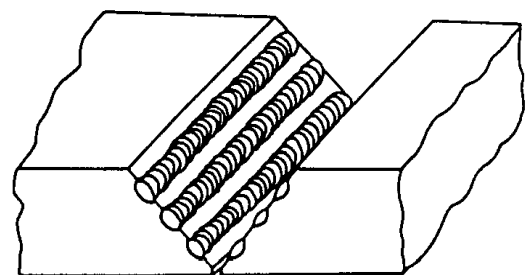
Groove face grooving for welding of cast irons. Source: Ref 1
